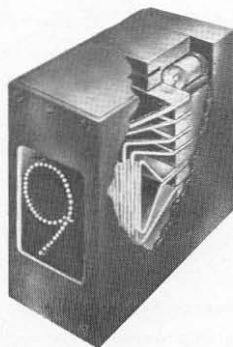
Cut-away view of the Type IND-0300, showing construction.
